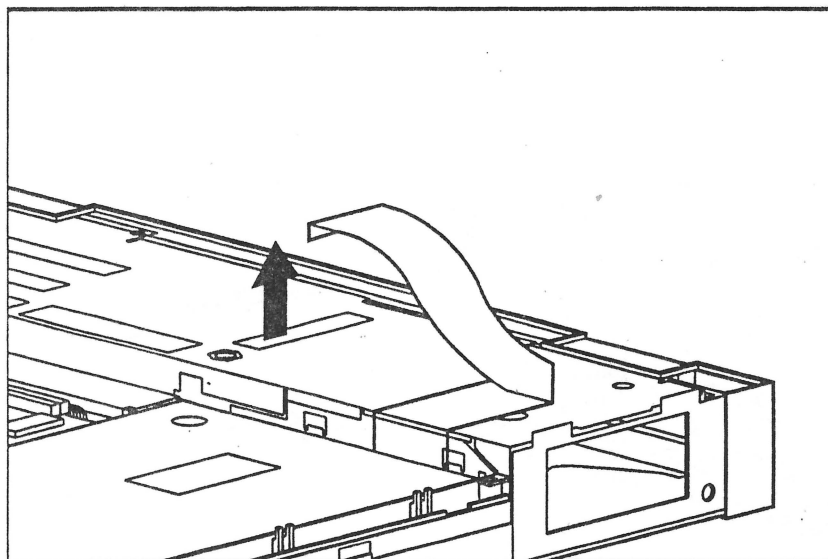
Removing the Diskette Drive Cable and ZIF Connector
